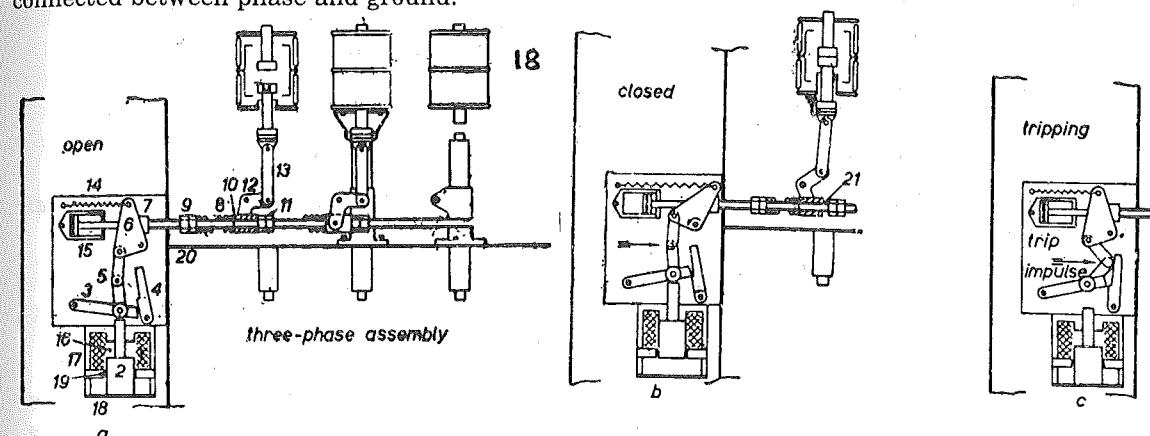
Details of Drive Mechanism of a 3-phase Metal enclosed 12 kV, 25 kVA Vacuum Switchgear with Solenoid-closing Mechanism.
